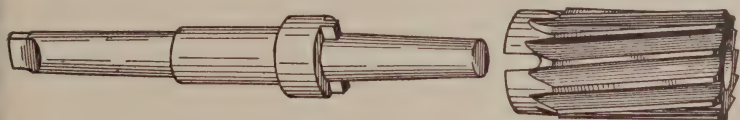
Shell-reamer arbor and shell reamer with spiral teeth.
